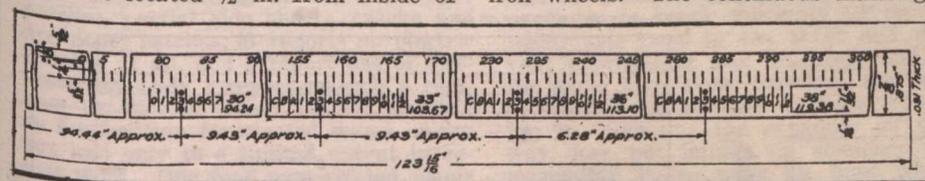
Additional Spaces to be added to Standard Wheel Circumference Measure Tape for Taping Wrought Steel Wheels.
